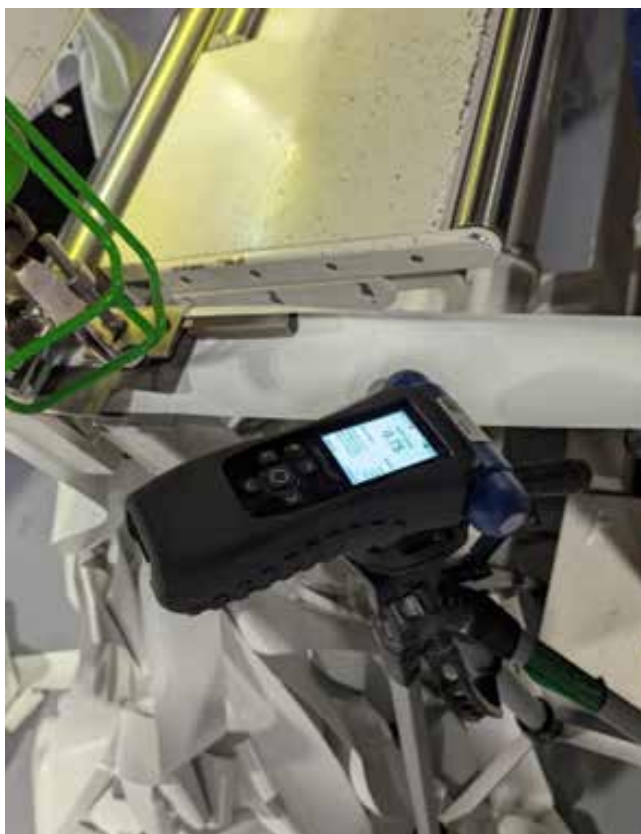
The Aeroqual Ranger with VOC sensor head is used to measure total VOCs during hot air welding.
